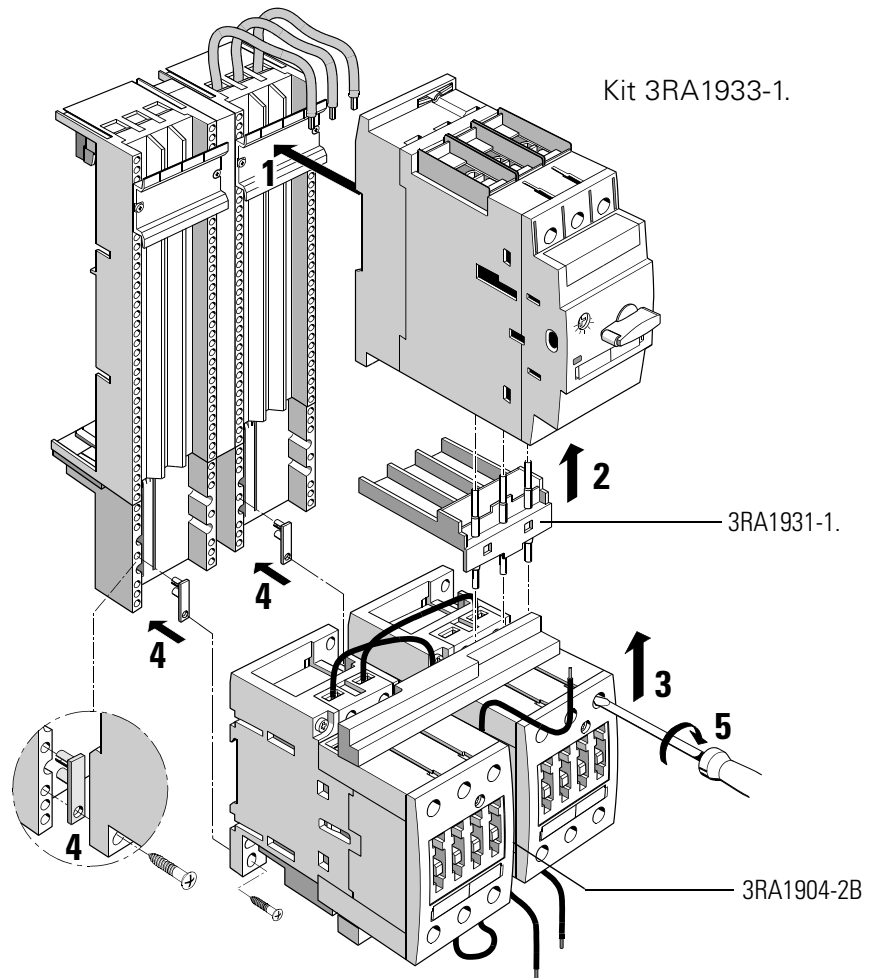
Self-assembly, busbars, reversing operation (frame size S2)
